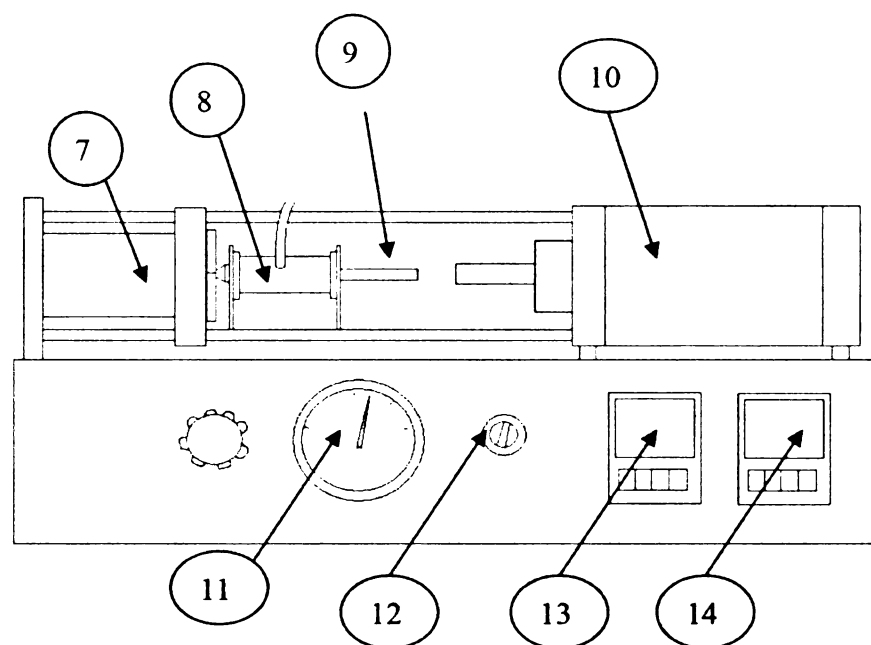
DSM Injection Molding Unit with (7) Mold and mold heater; (8) Transfer cylinder ;(9) Piston; (10) Pneumatic piston; (11) Pressure gauge; (12) Piston control knob; (13) Mold temperature controller; (14)Transfer Cylinder temperature controller
